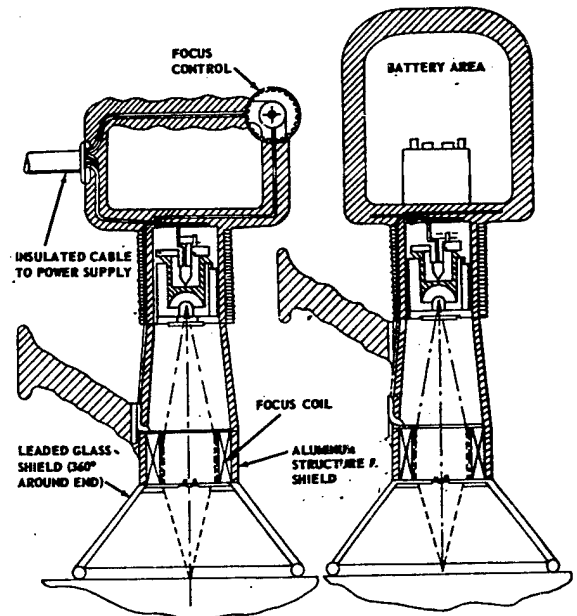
PORTABLE ELECTRON-BEAM WELDER
